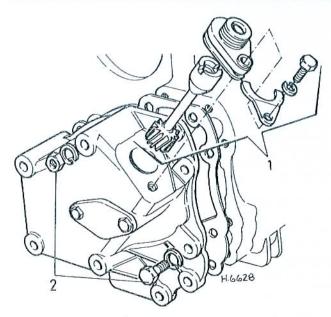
Removing the speedometer drive housing (Sec 4)
